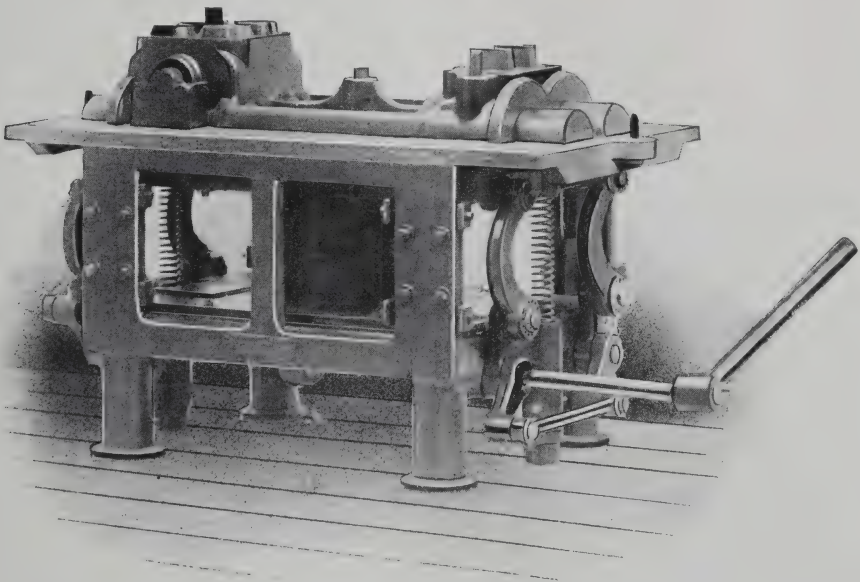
20 IN. BY 30 IN. HEAVY DOUBLE SHAFT MACHINE, MOUNTED WITH WOOD PATTERN OF "WORTHINGTON" STEAM PUMP.
